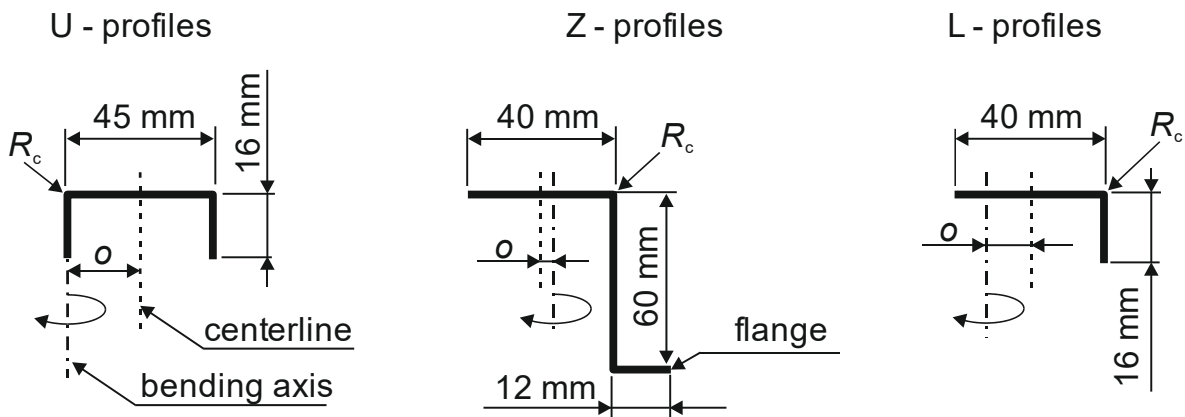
Cross sections manufactured from 42SiCr blanks. Offset  $o$  indicates the position of the bending axis during ISB.
